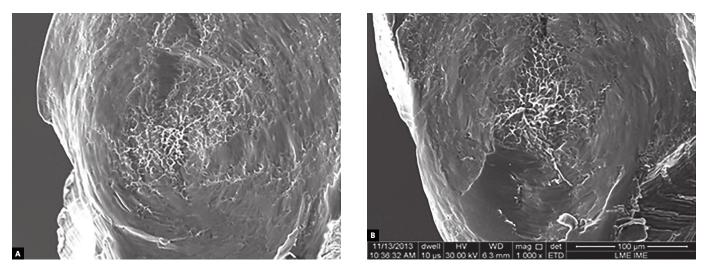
Ductile fracture surface: A) WaveOne Large; B) ProTaper F4 file (1000x magnification).
